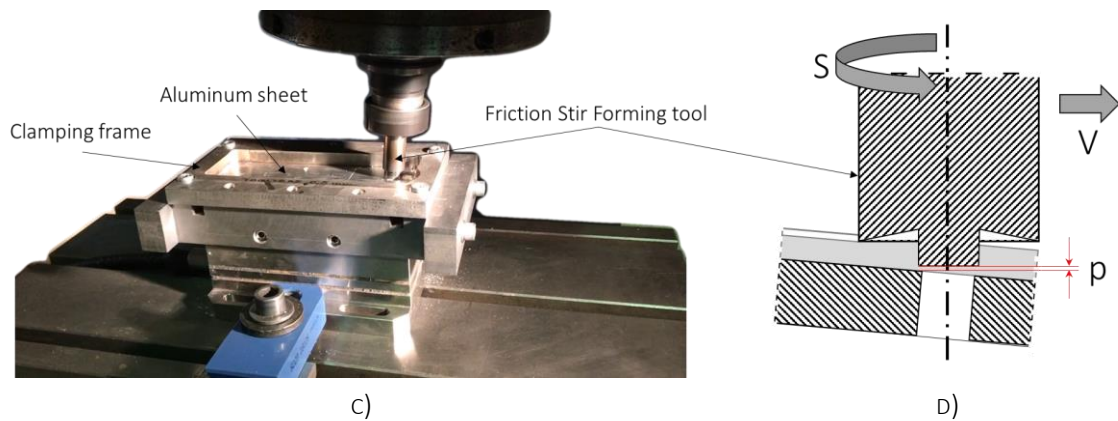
FRICTION STIR FORMING EQUIPMENT
